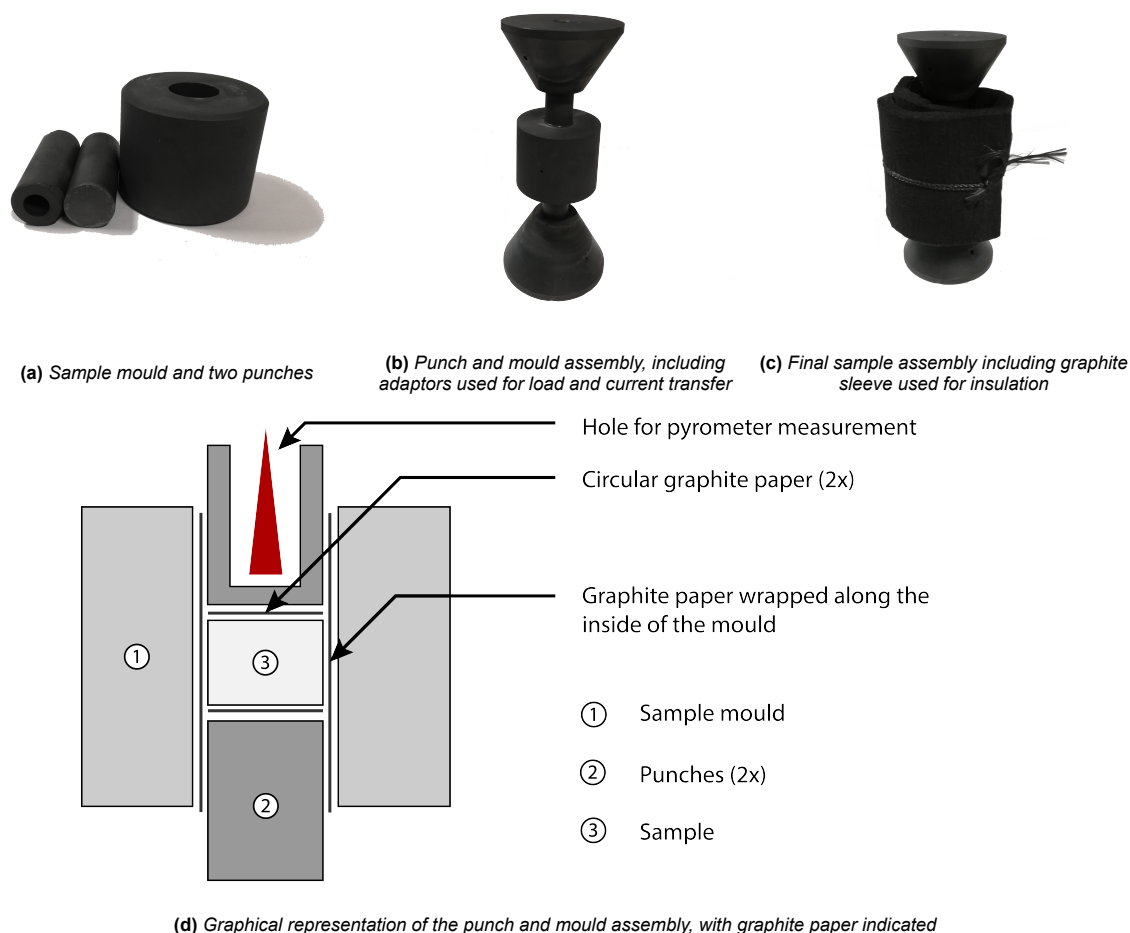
Components and schematic representation of the sample assembly used during sintering
